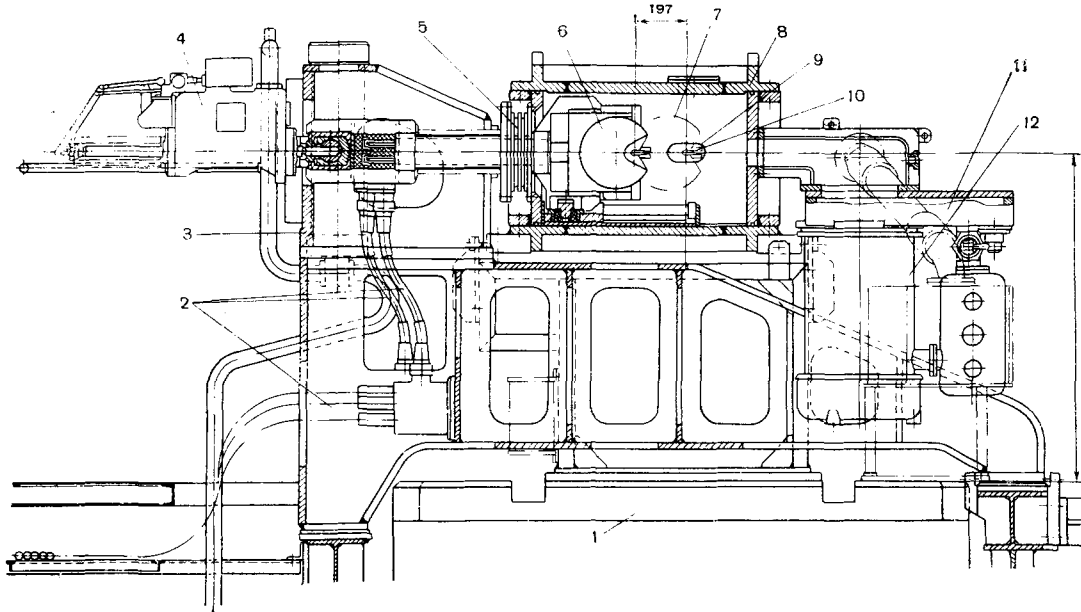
Sectional view of the kicker magnet in its vacuum tank:
